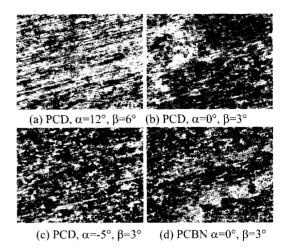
SEM photograph of the machined surface integrity by various tool shapes [WC-Co V60, v=10μm/s, t=10μm, ×500]
